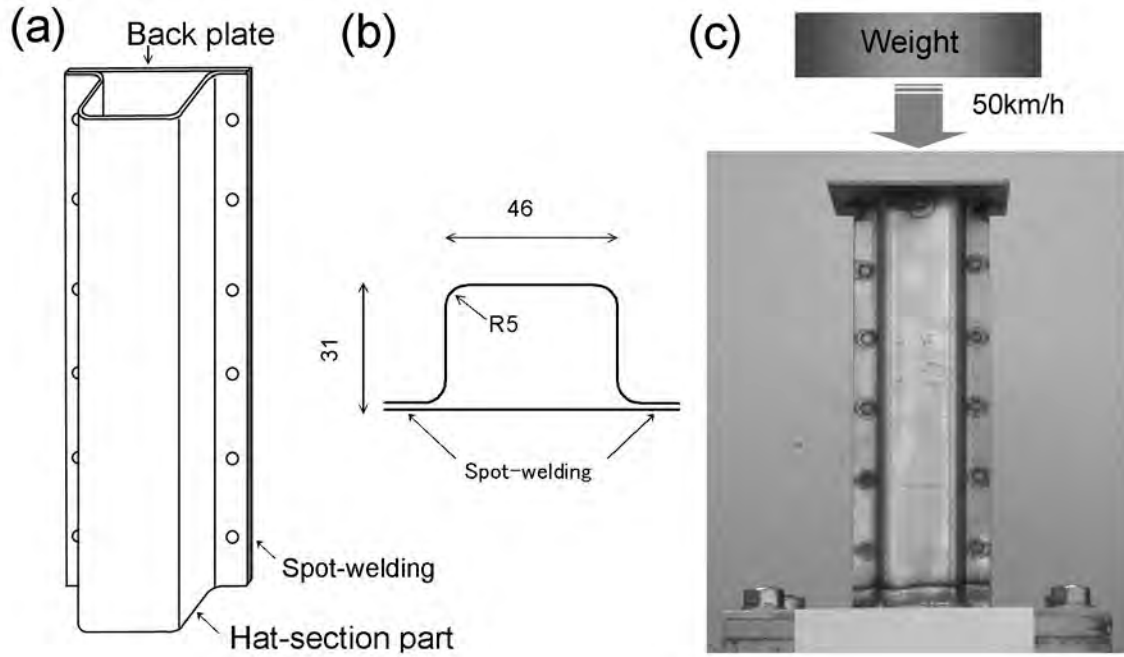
(a) Appearance of “hat column” used in dynamic axial collapse tests, (b) cross section of the hat column, and (c) a picture of the hat column with steel plates set on a dynamic collapse test equipment.
